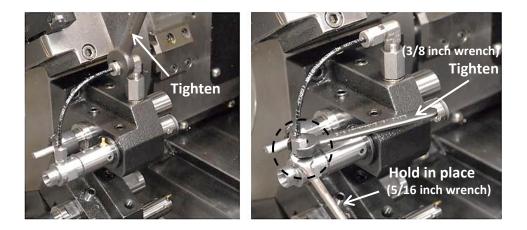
Tightening of the hex nut on the coolant line to the compression fitting on the coolant manifold (left). Tightening of the hex nut on the coolant line to the compression fitting on the TriboMAM body (right).
